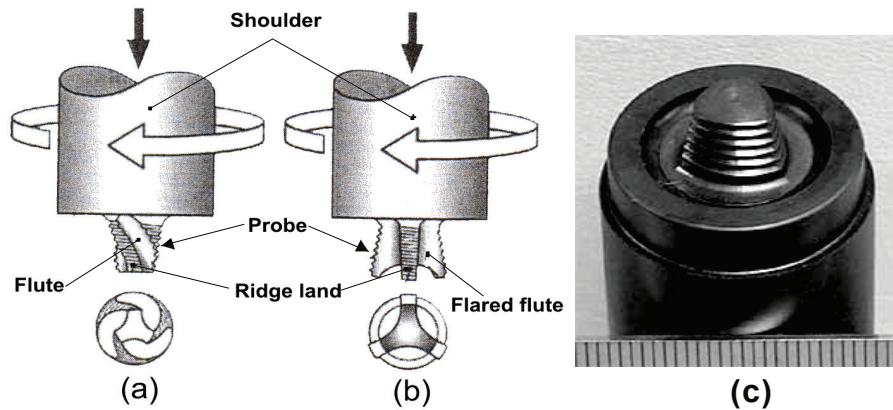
Pin (probe) variants for FSW: (a) MX Triflute™ for butt joints [76], (b) Flared Tri-flute™ with tip profile for lap welding [76] and (c) MX Trivex tool™ [77]
